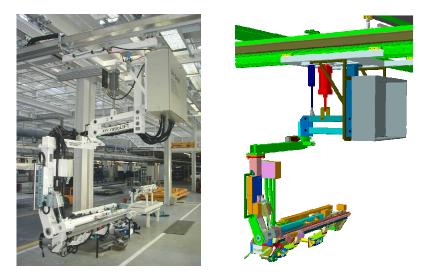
Cockpit manipulator used by assembly in real factory and its 3D model
